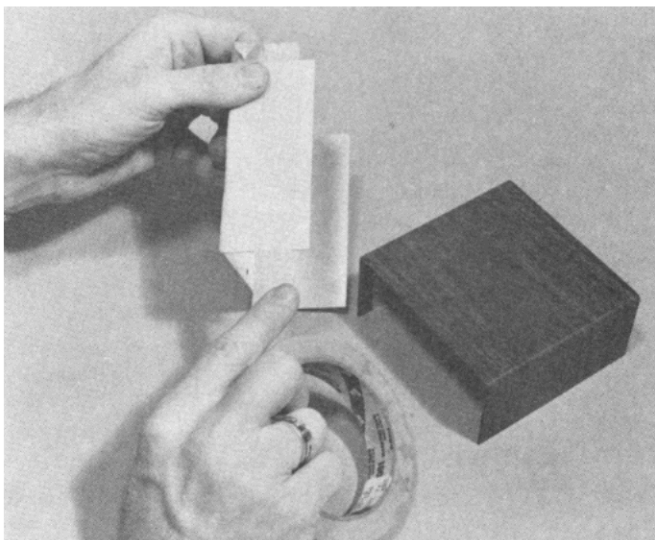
Apply masking tape to the front and back of the enclosure to protect its finish while marking and cutting all necessary holes.
